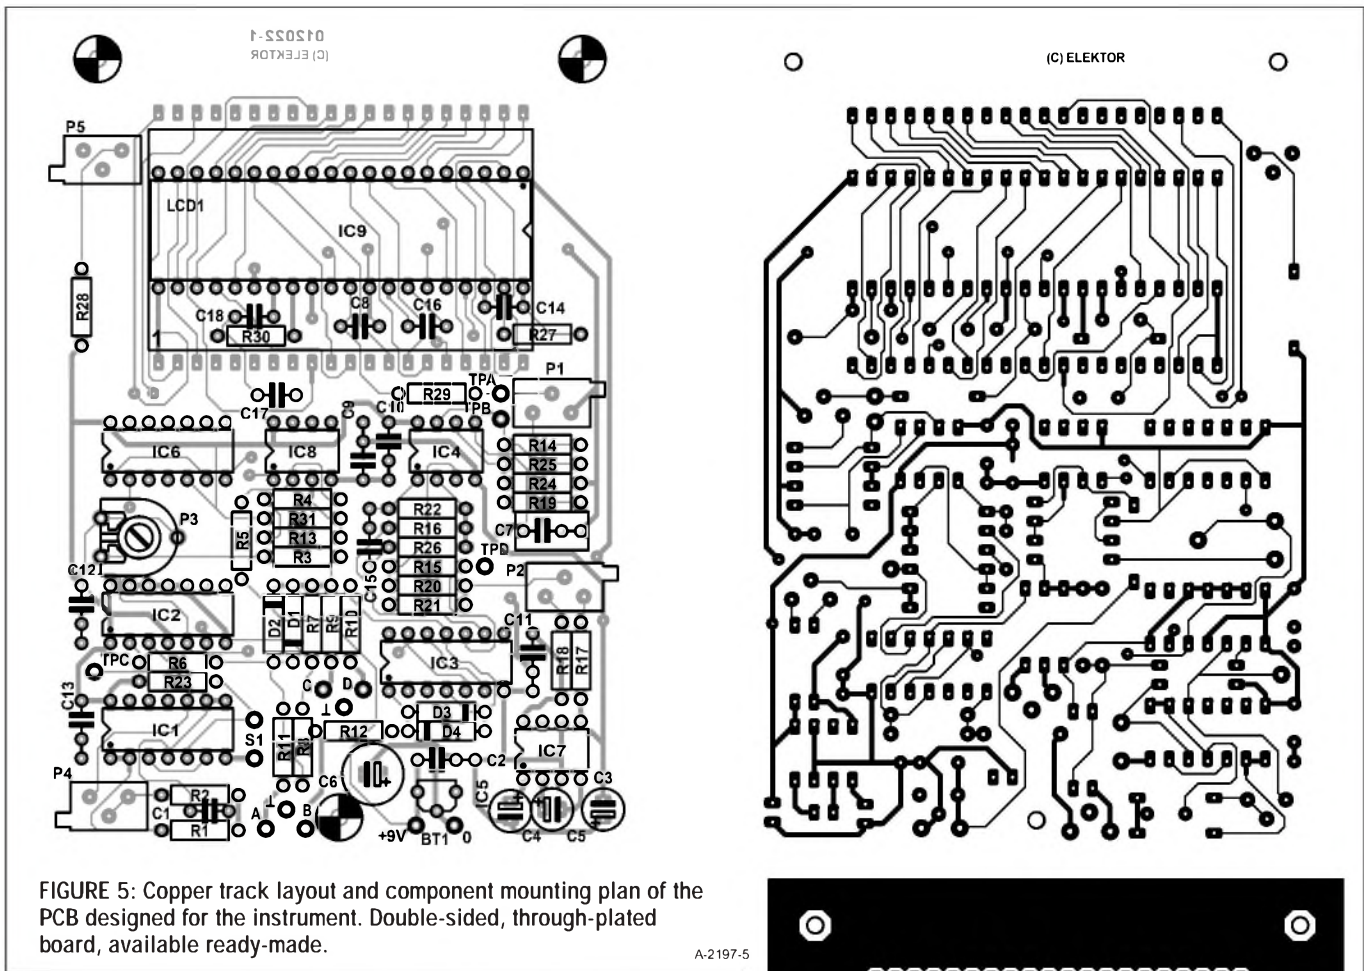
Copper track layout and component mounting plan of the PCB designed for the instrument. Double-sided, through-plated board, available ready-made.
